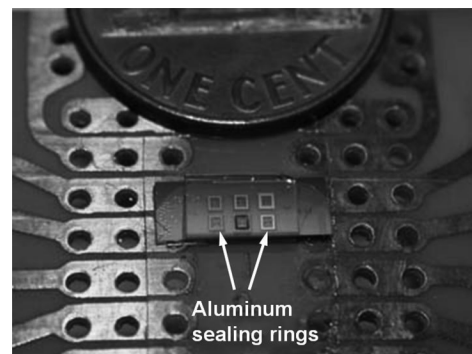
A packaged die is die-attached and wire bonded to a PC board and is ready for measurement. In this case, a total of six microresonators are packaged in parallel.
